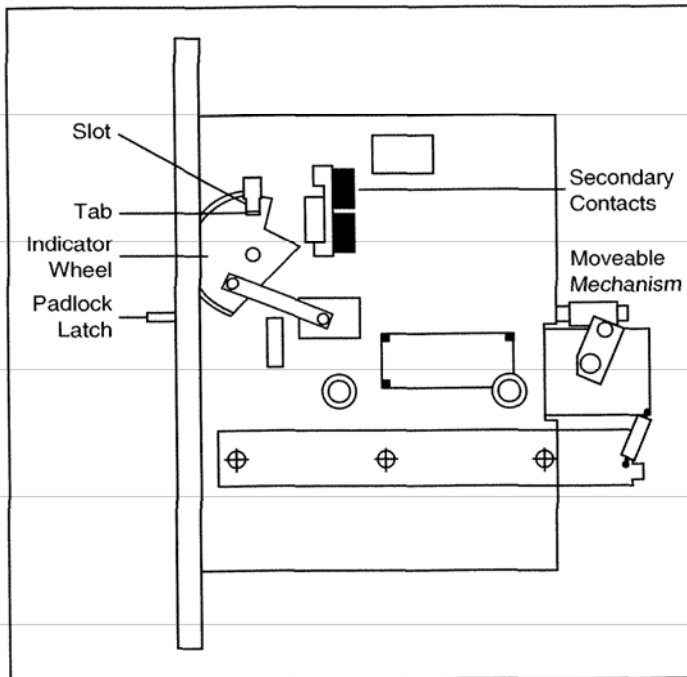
Indicator Wheel Shown in Test Position with Tab in Slot
